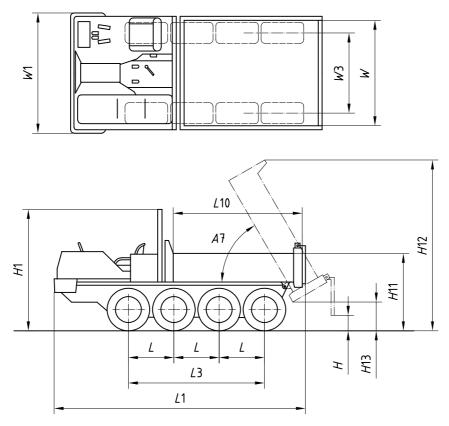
Dimensions of wheeled compact dumper — Eight-wheel
